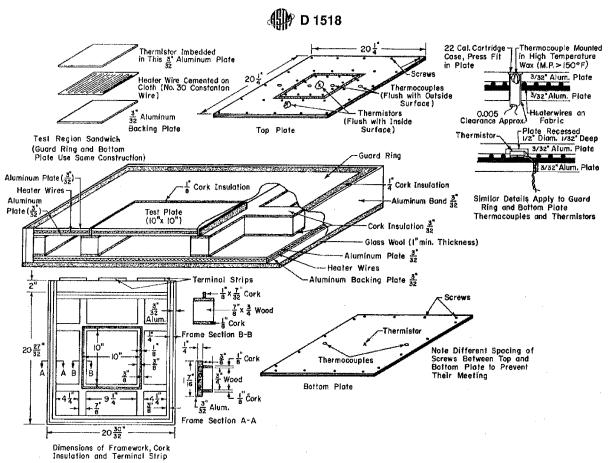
Apparatus for Measurement of Thermal Transmittance, Showing Dimensions
